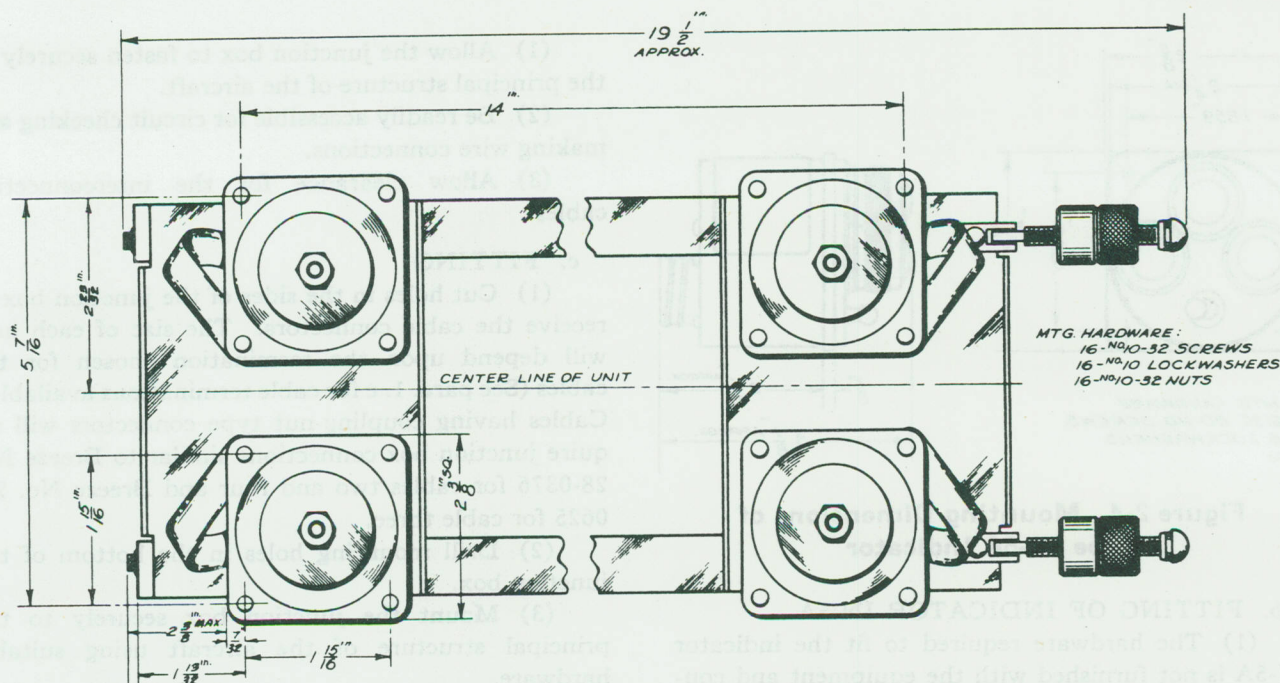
Mounting Dimensions of Type MR-64A Shockmount
